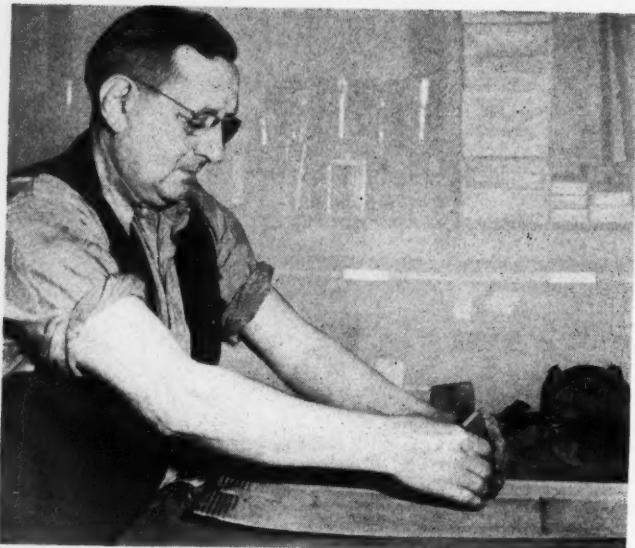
Old Glue is Removed by Scraping with a Hand Scraper
